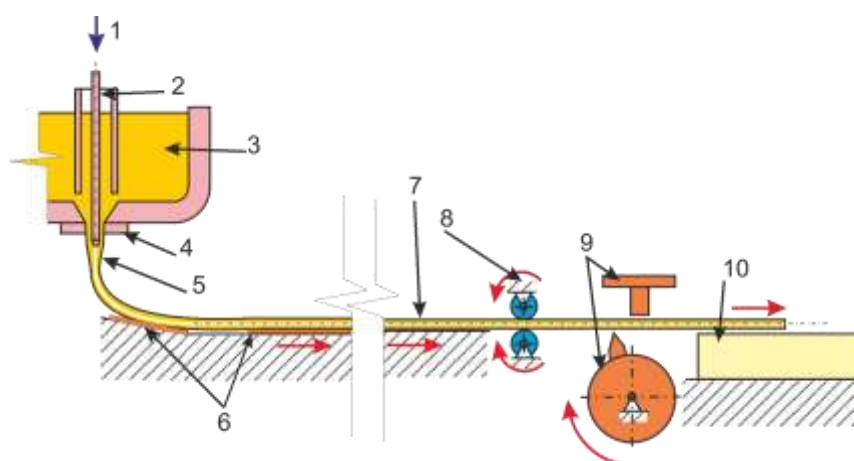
Diagram of single-stage drawing of seed beads: 1 - compressed air, 2 - plunger, 3 - glass melt, 4 - orifice ring, 5 - glass melt spout, 6 - wooden board, 7 - drawn tube, 8 - drawing device, 9 - separator, 10 - bin
